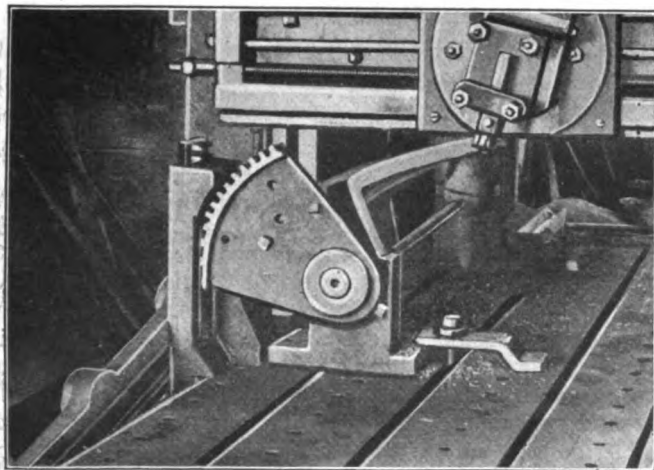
END VIEW, SHOWING SEGMENTAL GEAR AND RACK
